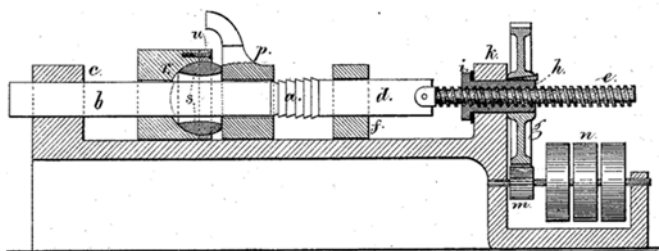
Broaching machine patented by Stephens in 1873 [91].
